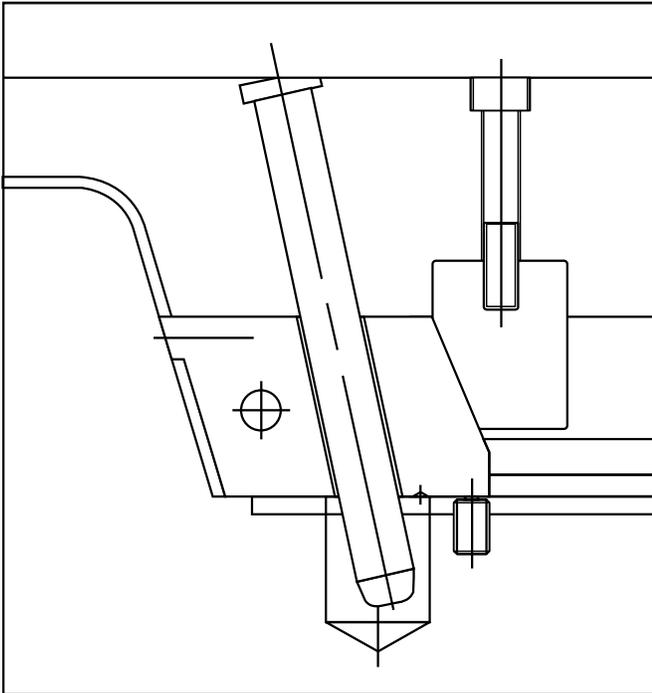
Slide Movement example using an angle pin and locking with a heel block (wedge).
